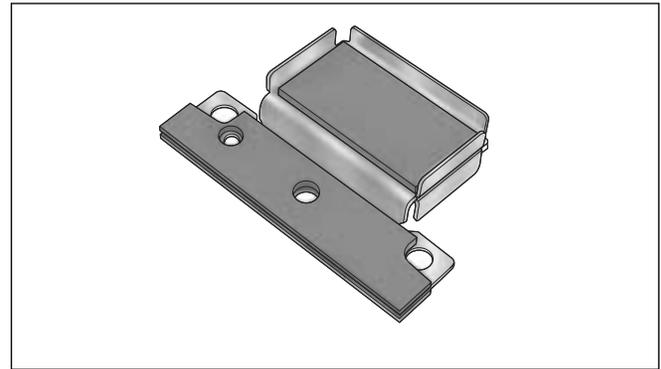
Brake Caliper Piston Remover (Part No. HD-43293A)
